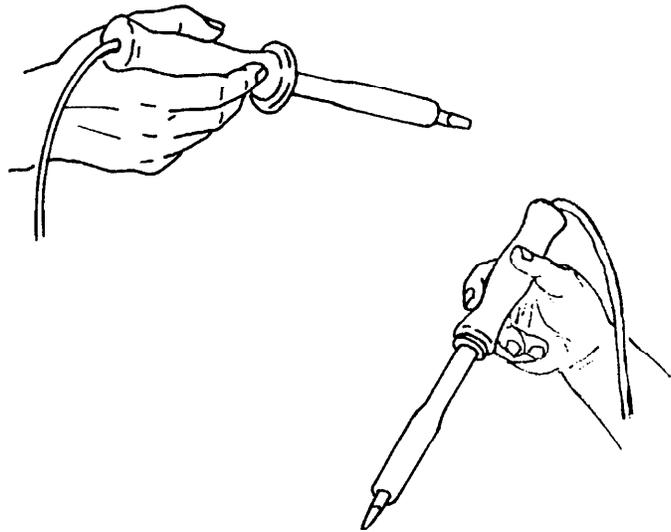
Pencil Grip Method of Holding Soldering Copper.
